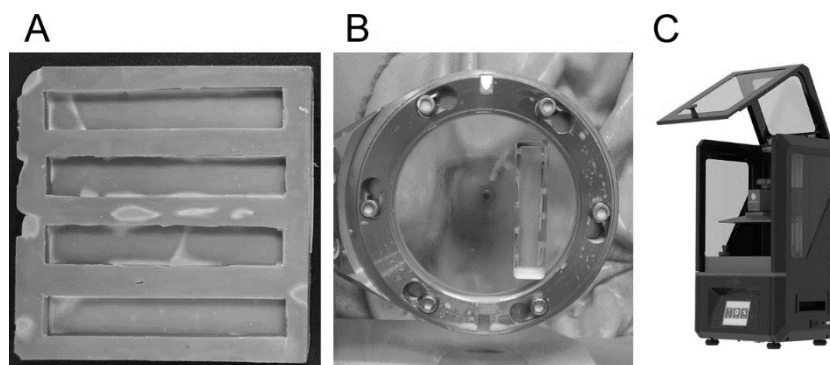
Addition silicone mold (A), Milling machine BR3D (Tecnodrill) (B), and Anycubic Photon S (C)
